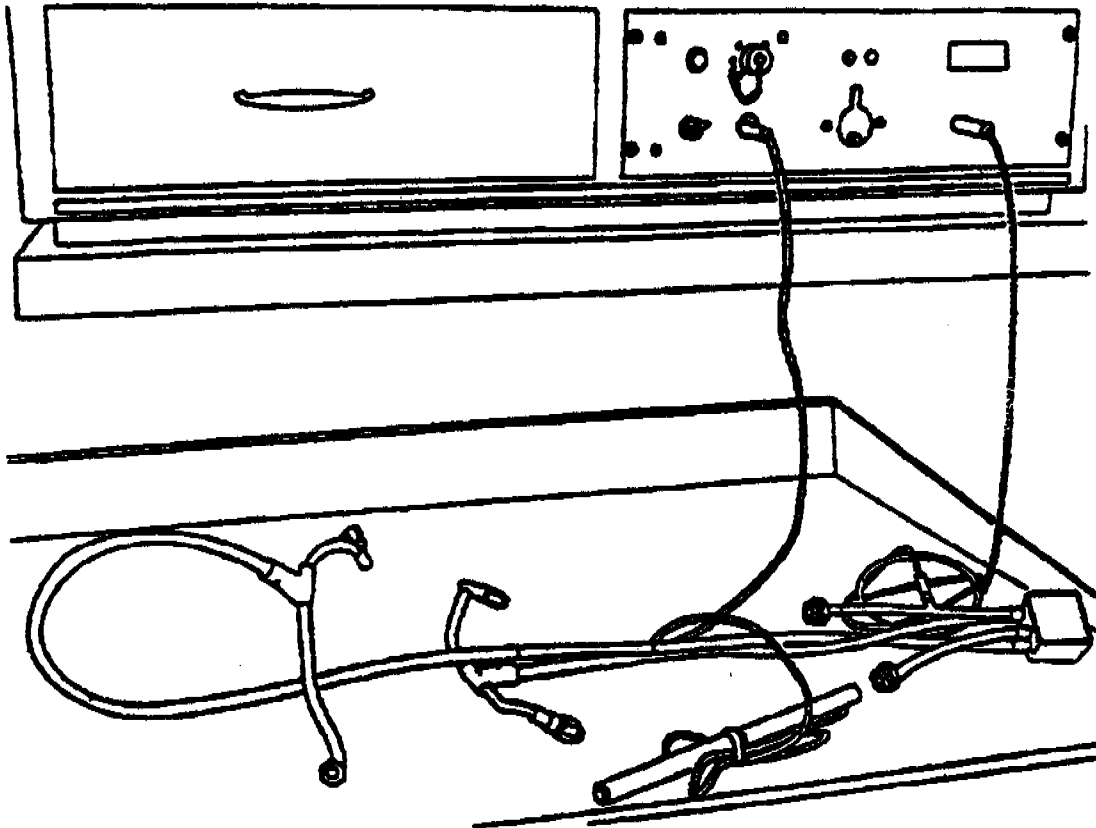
Checking Ignition Coll and Lead Assembly for Electrical Leakage.
